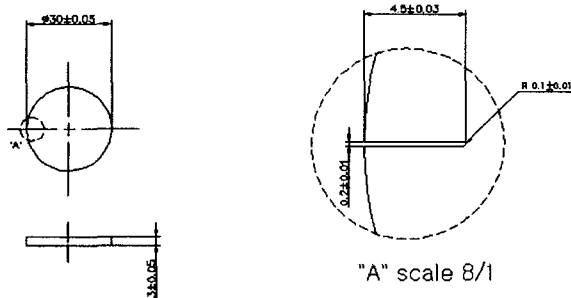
Shape and dimension of thermal shock fracture toughness specimen
